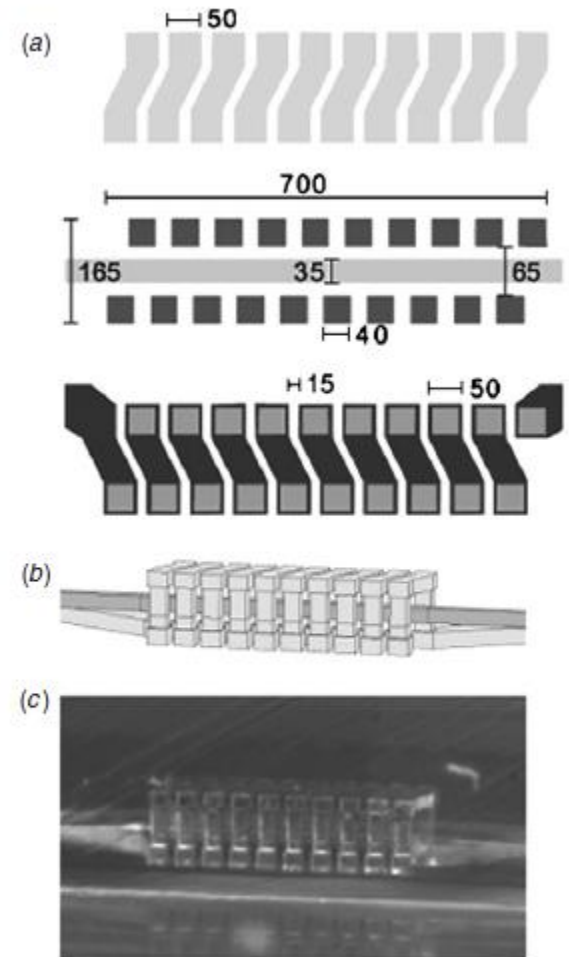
(a) CAD drawing of three individual layers used in constructing the coils. Dimensions listed are in μm . (b) CAD drawing of a finished coil assembly. (c) Optical microscope image of a completed coil.
